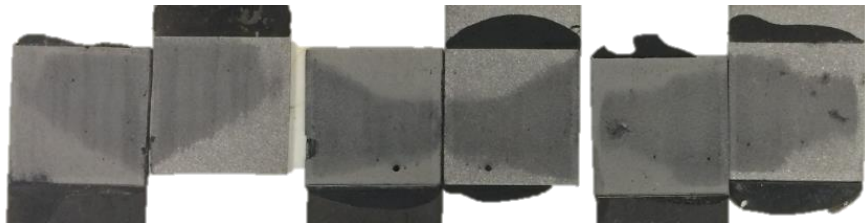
Failure modes of CFRP (2.1 mm)/HSS (2 mm) 25 mm overlap SLJs tested specimens
